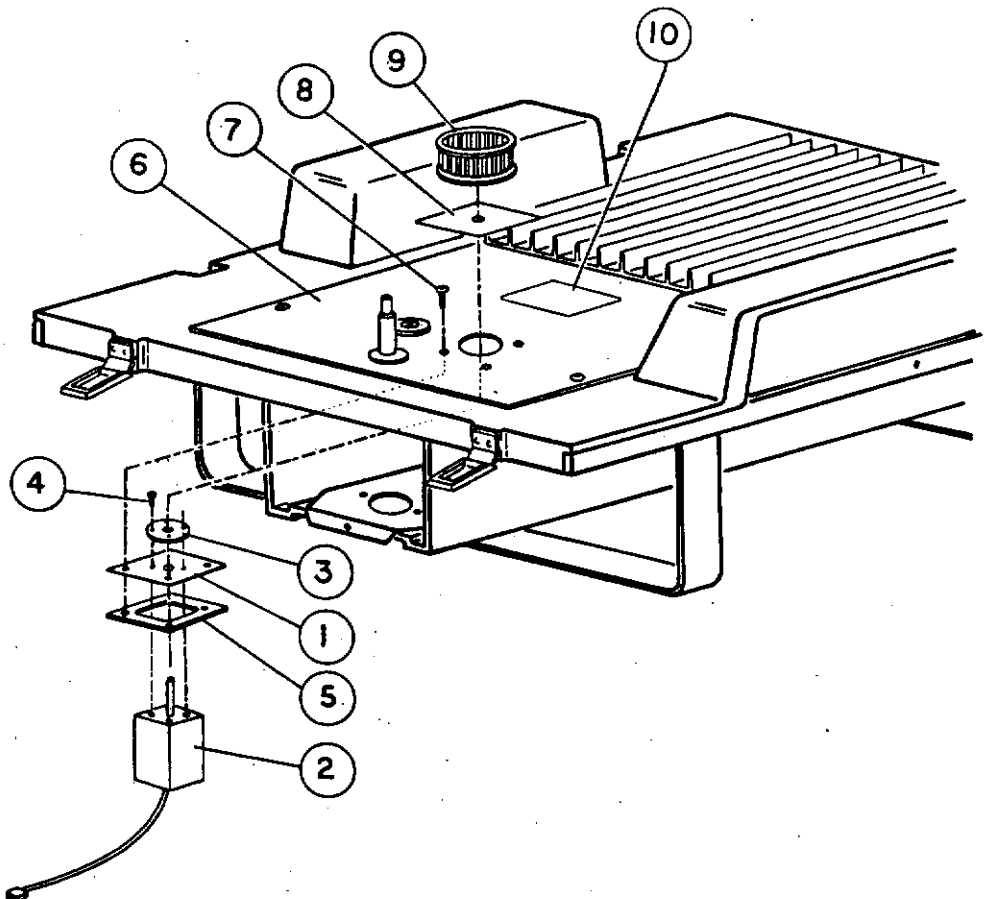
INSTALLATION OF REPLACEMENT MOTOR ASSEMBLY
